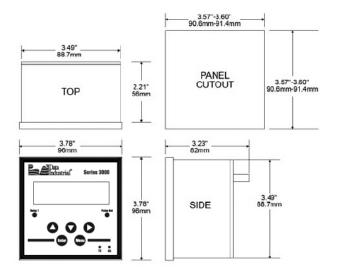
Series 3050 Panel Mount and Mounting Dimensions
